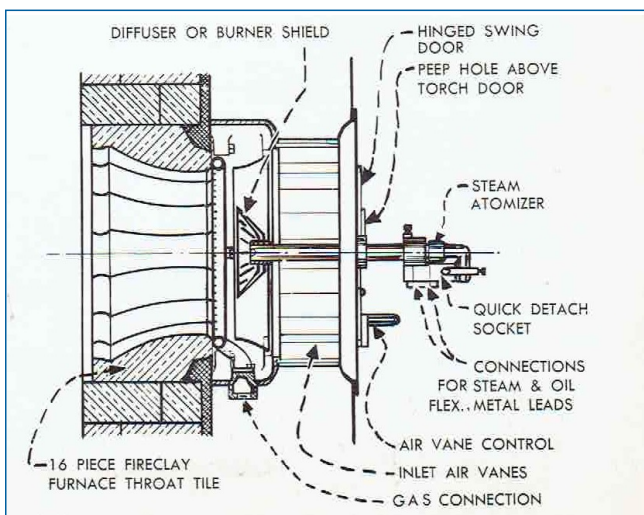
CONVENTIONAL GAS & OIL REGISTER TYPE BURNER
